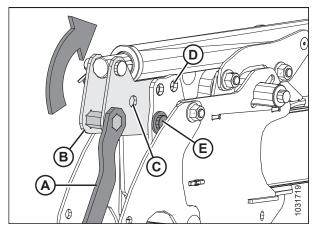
Fore-Aft Cylinder Adjustment Type 1 – Forward Position
